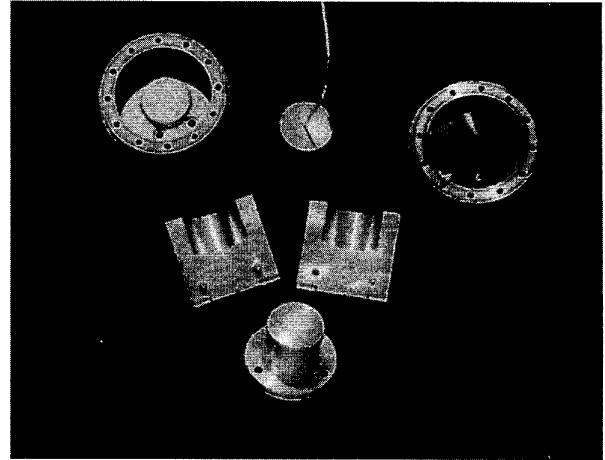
Transducer fabrication assembly tooling, active cap, and E8 transducer heads
